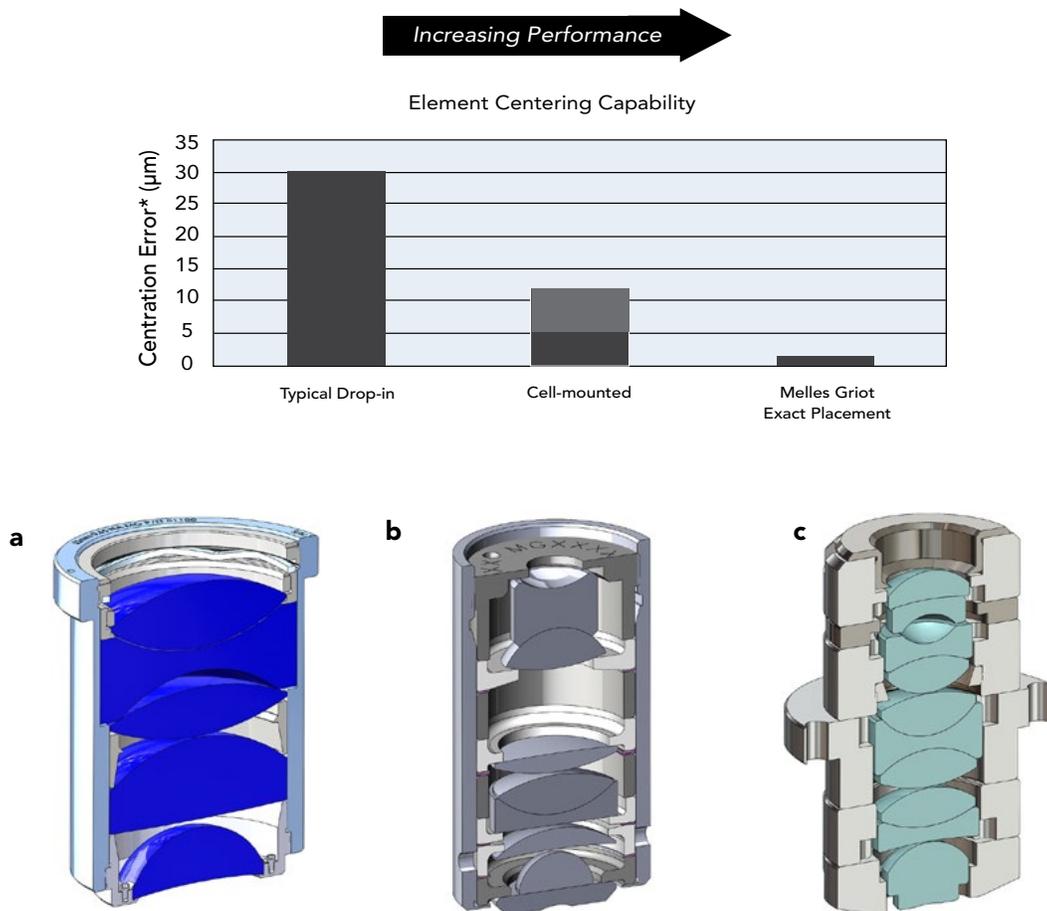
Melles Griot Exact Placement assembly technology enables a much higher level of positioning accuracy than the drop-in and conventional cell-mounted construction methods.
